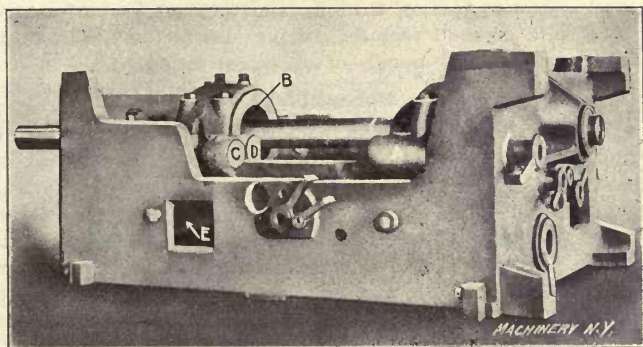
Another View of the Jig in Fig. 135. Note that Holes are Drilled or Bored from All Sides
